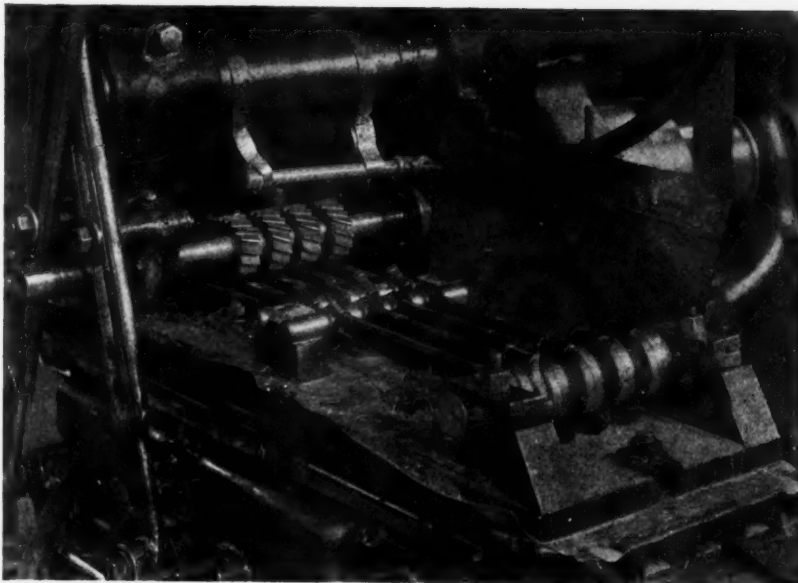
Connecting-rods are purchased in the blank and are first straightened by hand and then milled on the sides and ends
